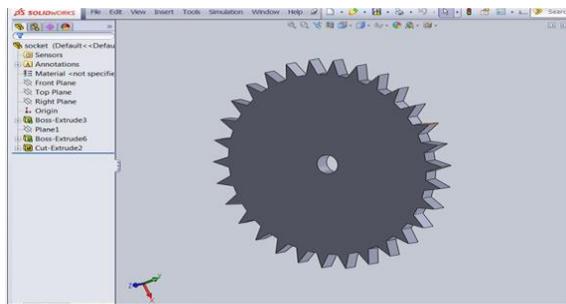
The exploded view of the stair-climber Sprocket.
